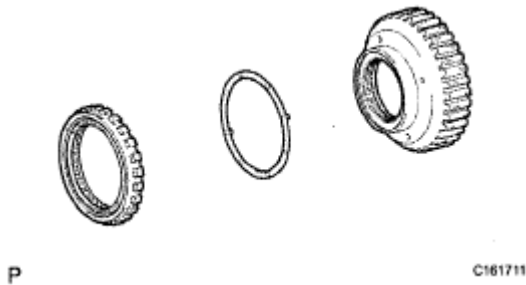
Identifying 1-Way Clutch Inner Race Sub-Assembly
